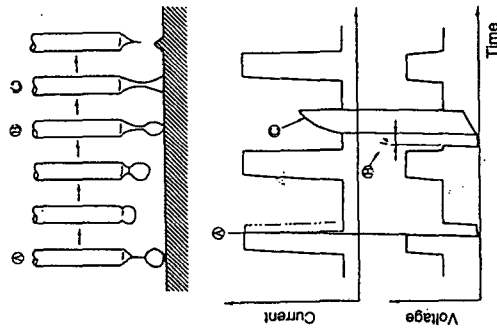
Welding current wave control for MAG welding process called synchronized short circuiting control
